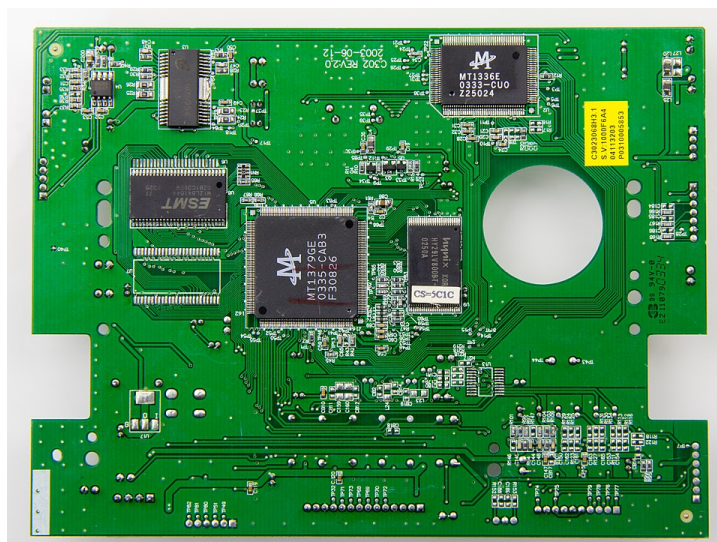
Placed Components on a printed circuit board (PCB) (Source: https://en.wikipedia.org/wiki/Printed_circuit_board)
